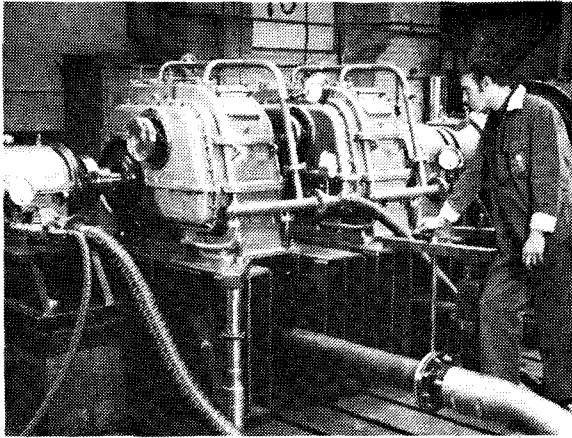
Tyne gear units on test rig for full load "back to back" testing
